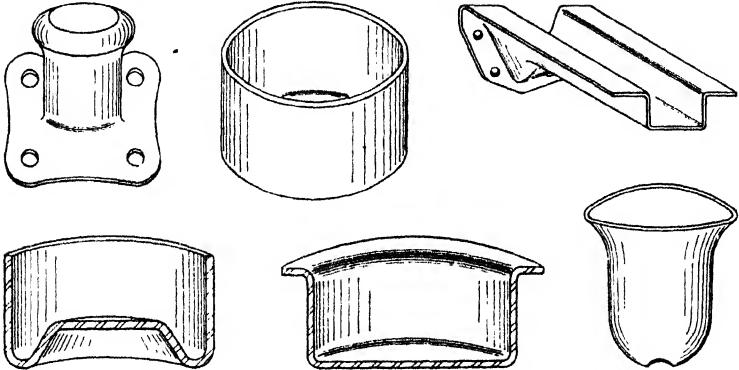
Medium to heavy stampings (classification 6) that involve moderately deep draws and/or forming.
